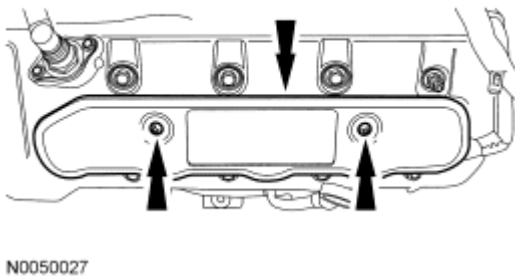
Locating LH Coil-On-Plug Cover Bolts
